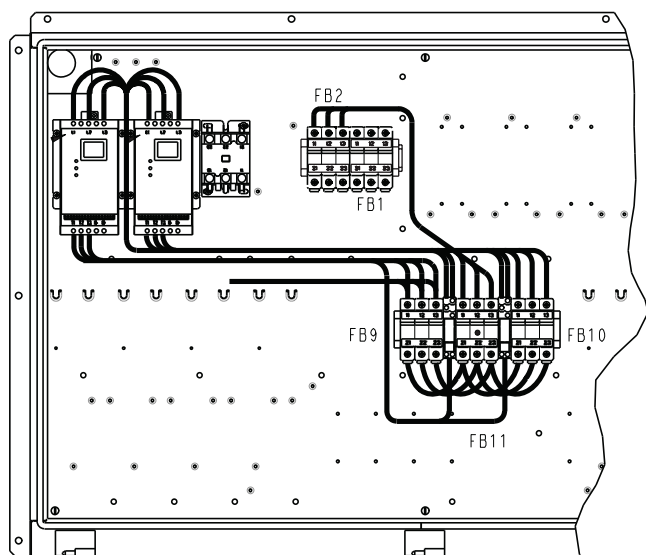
Motormaster V Power Wiring — 38APD070-100 Units
